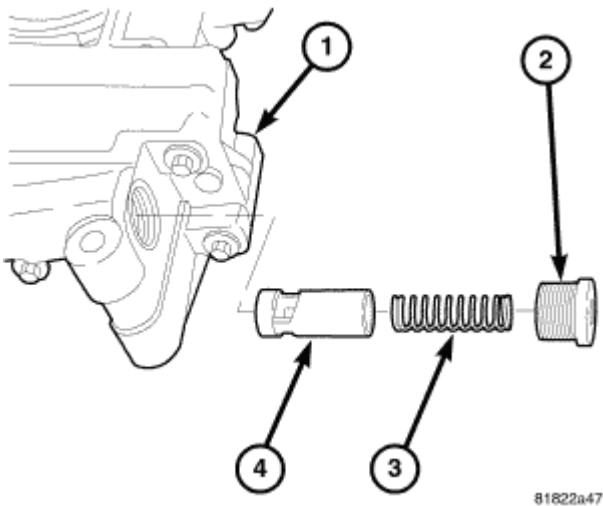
OIL PRESSURE RELIEF VALVE
